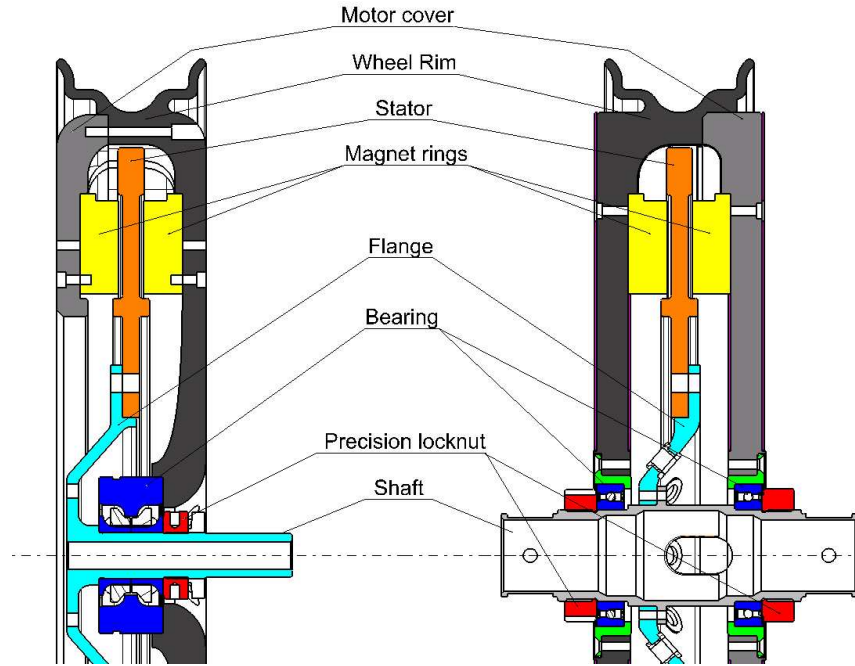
Left: Motor, Csiro motor with new mechanical design investigated in this paper, right: Test load, Csiro motor based on the Aurora solar team motor design [4] and [5]
